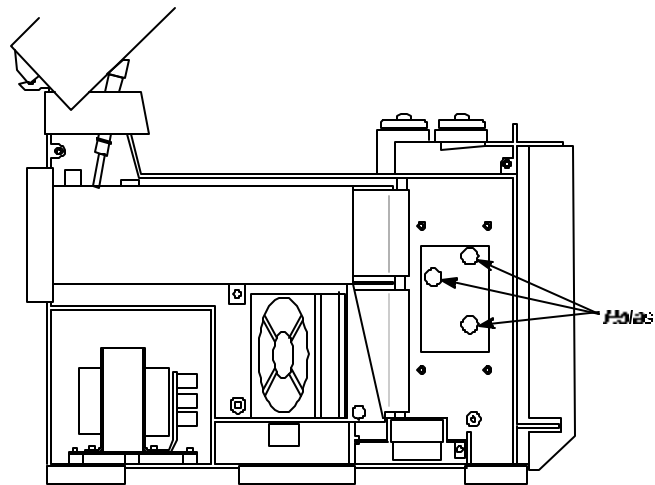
1 Left panel removed to reveal left side of the oven exterior.
